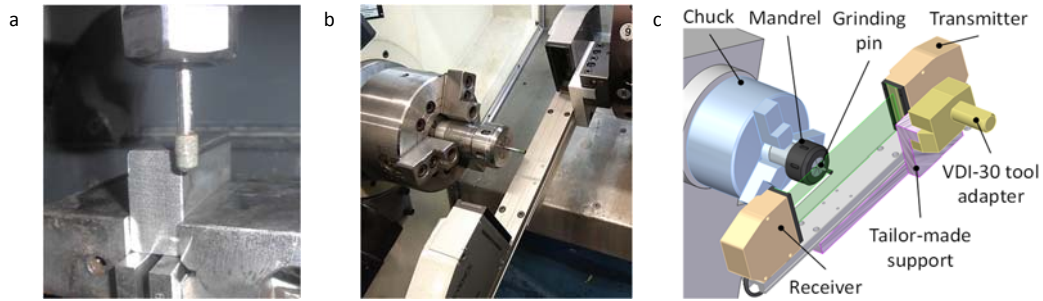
(a) Machining with a CBN grinding pin; (b) Measuring the grinding pin with a Laser Micrometer; (c) Set up of the Laser Micrometer in the CNC lathe.
